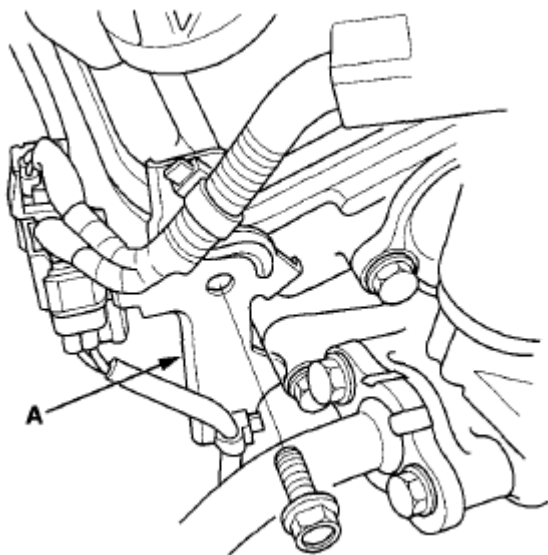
Removing Connector Bracket From Front Cylinder Head
